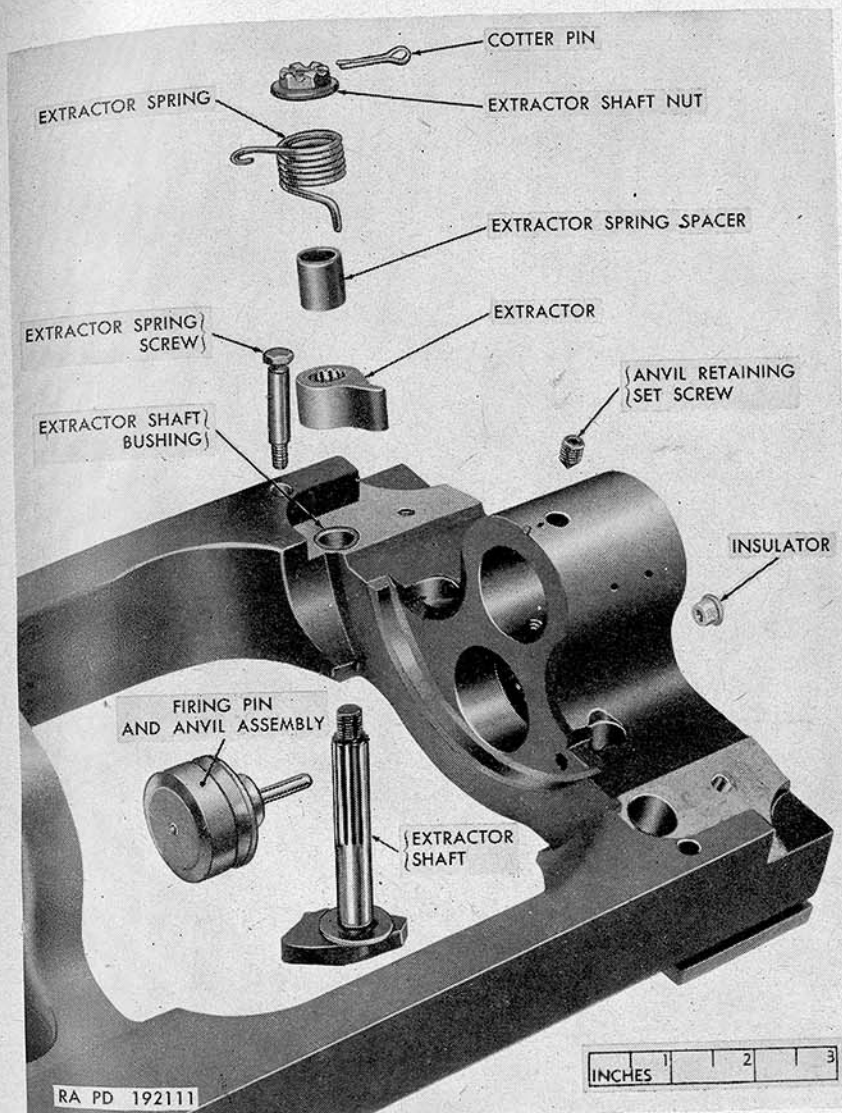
Extractor group and firing pin and anvil assembly—exploded from drum cradle.
